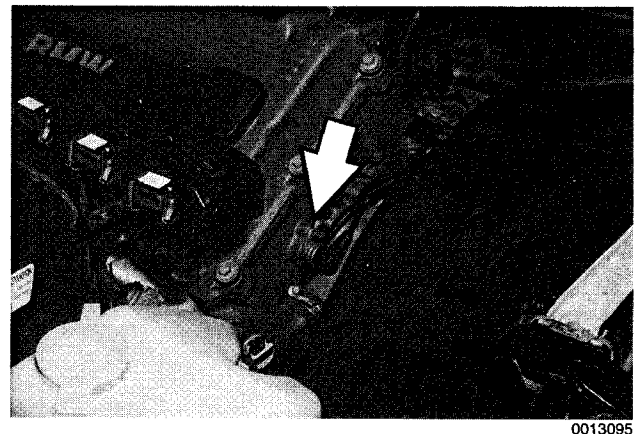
Camshaft position sensor mounting bolt (arrow). M42 engine shown.
